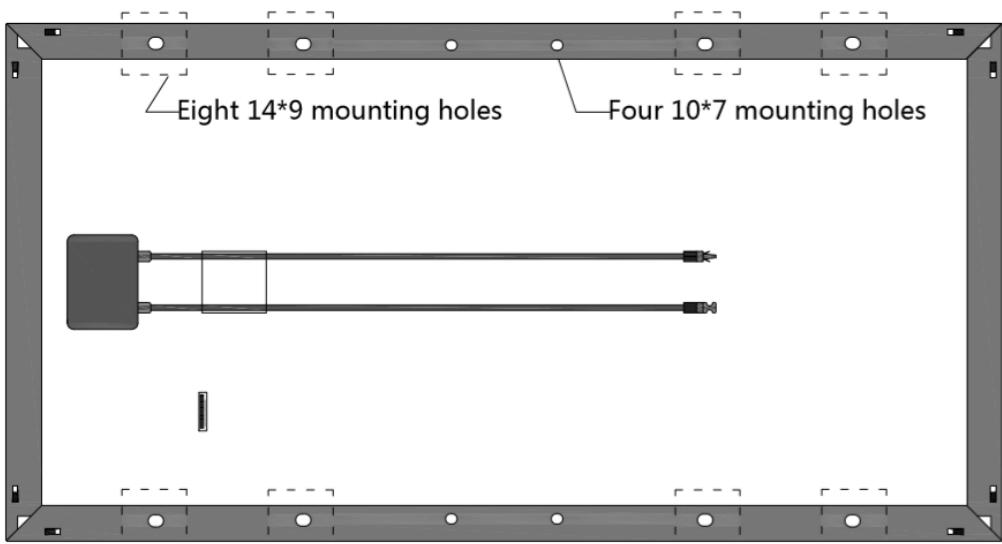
PV module installed with bolt fitting method (eight mounting holes)
